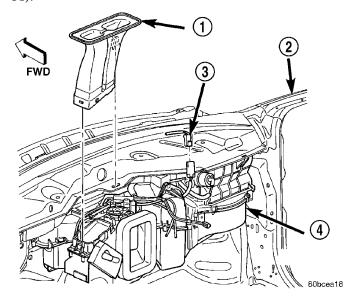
HVAC HOUSING DEFROSTER DUCT - (RHD SHOWN)
